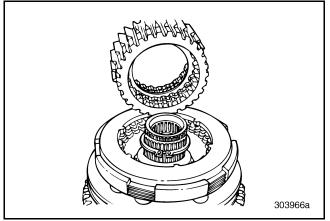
Installing Hi-Range/Hi-Split Gear into Synchronizer (T313L/T318L Shown)
